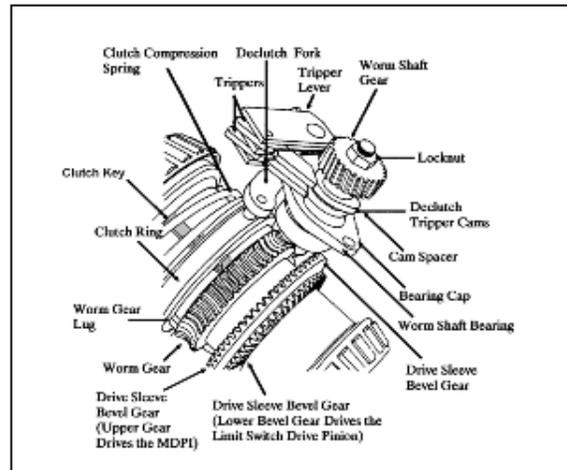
SMB-000 Actuator Drive Sleeve Assembly
